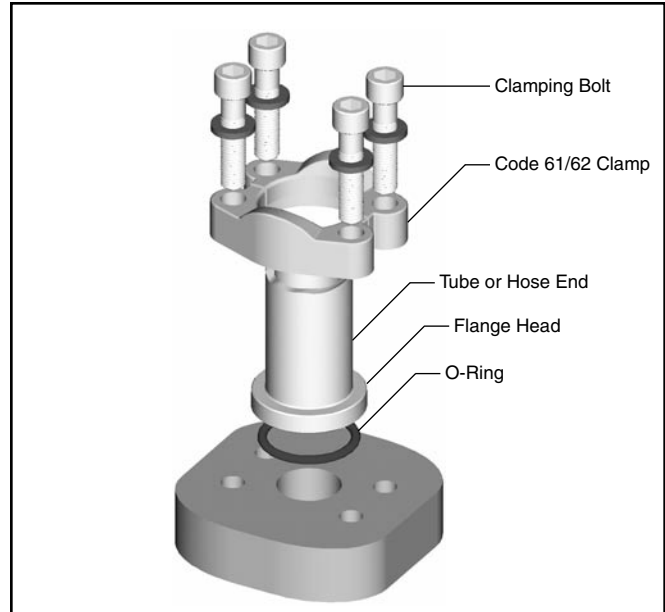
Four-Bolt Flange Connection (SAE J518)
